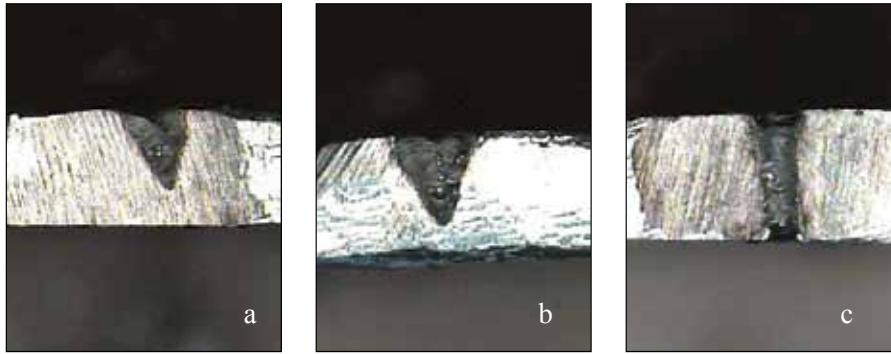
(a,b,c): Specimens welded at 260V and spot diameter of (a) 1mm, (b) 0.8mm, (c) 0.6mm
